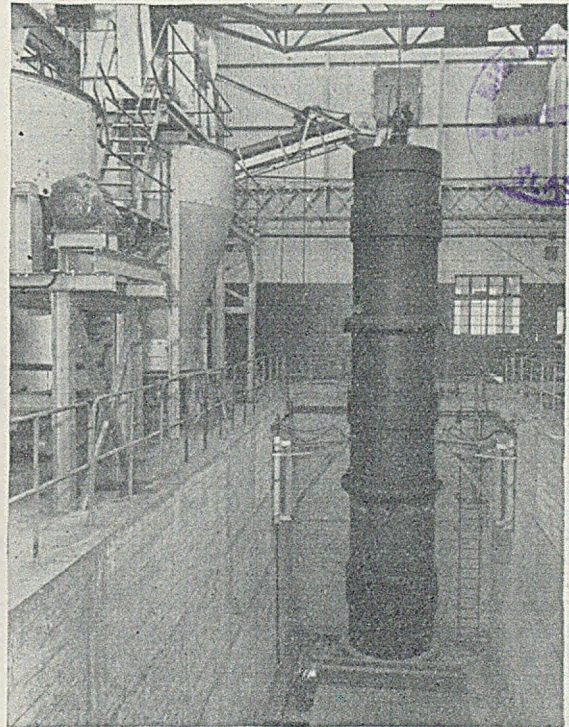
Ramming in Progress for a Flask 66 in. i.d. and 33 ft. long. The weight of Finished Mould is 43 tons.
